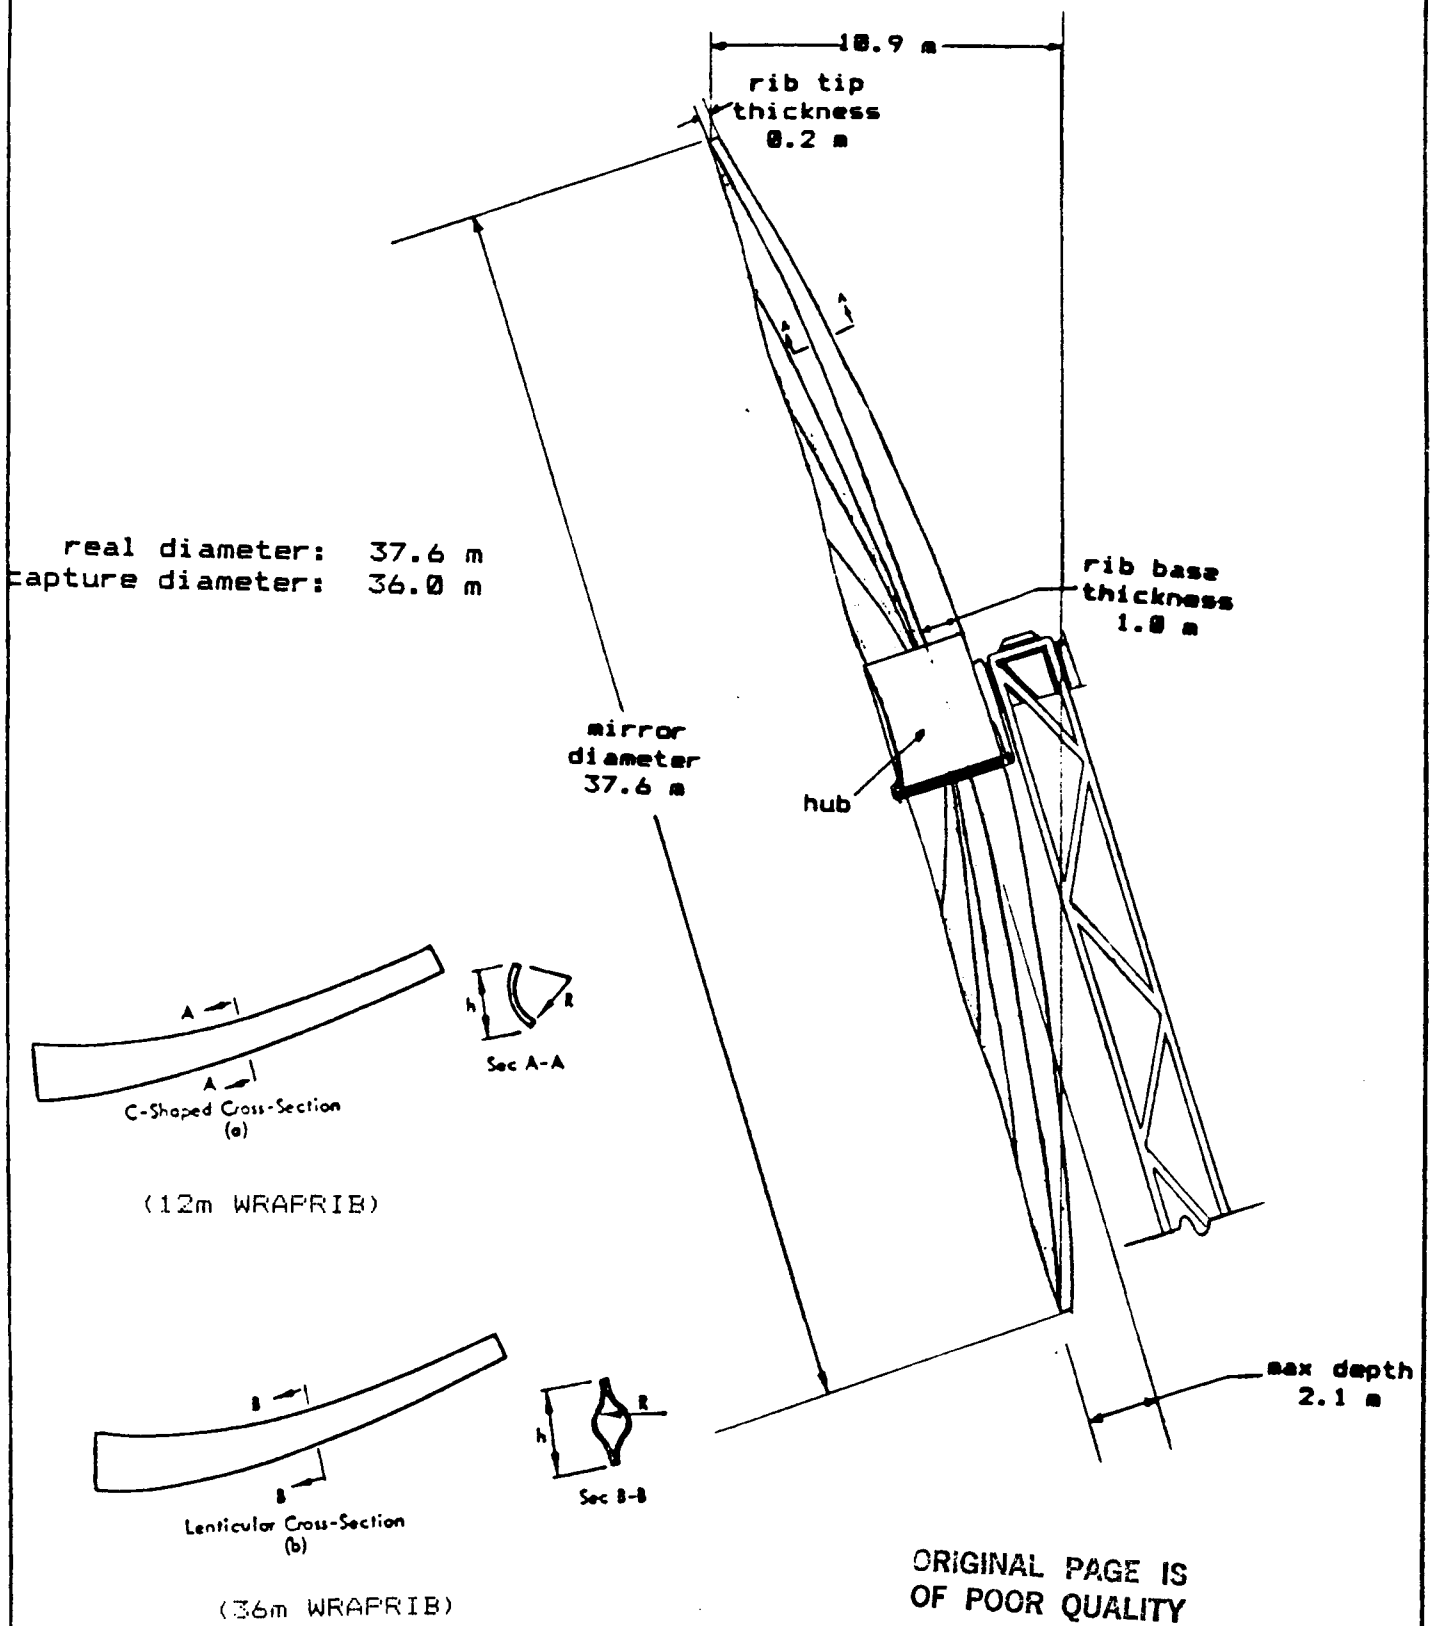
WRAP-RIB SIDE SECTION VIEW
